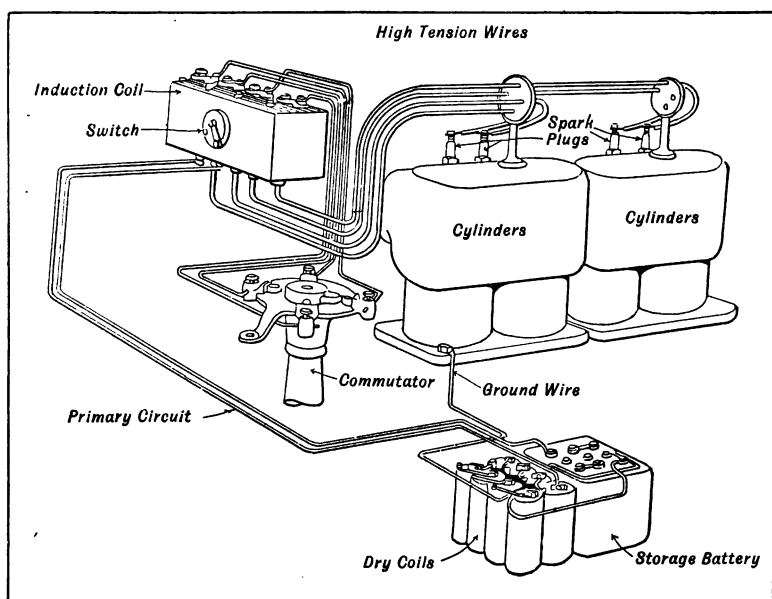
Assembly View of Four Cylinder Battery Ignition Group, Showing Devices and Methods of Wiring.
